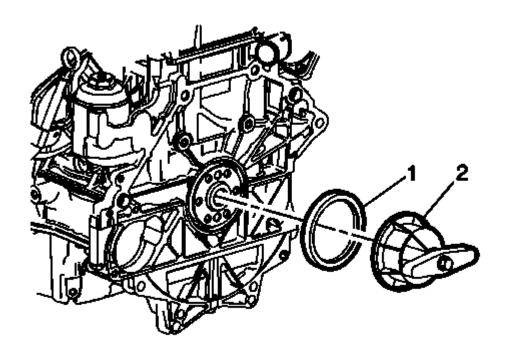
Crankshaft Rear Oil Seal Courtesy of GENERAL MOTORS COMPANY
